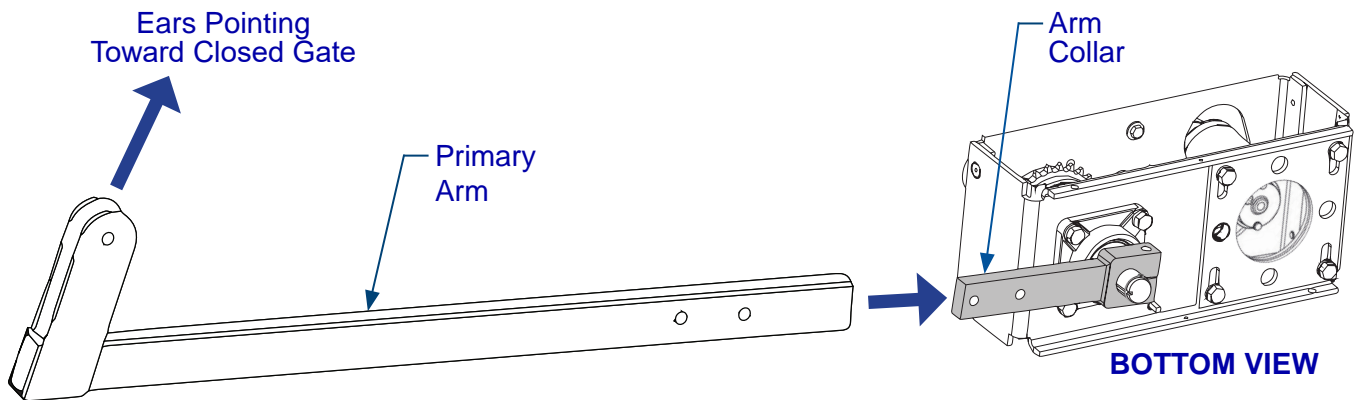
Install Primary Arm to Collar of the Main Drive Shaft (Bottom View)
